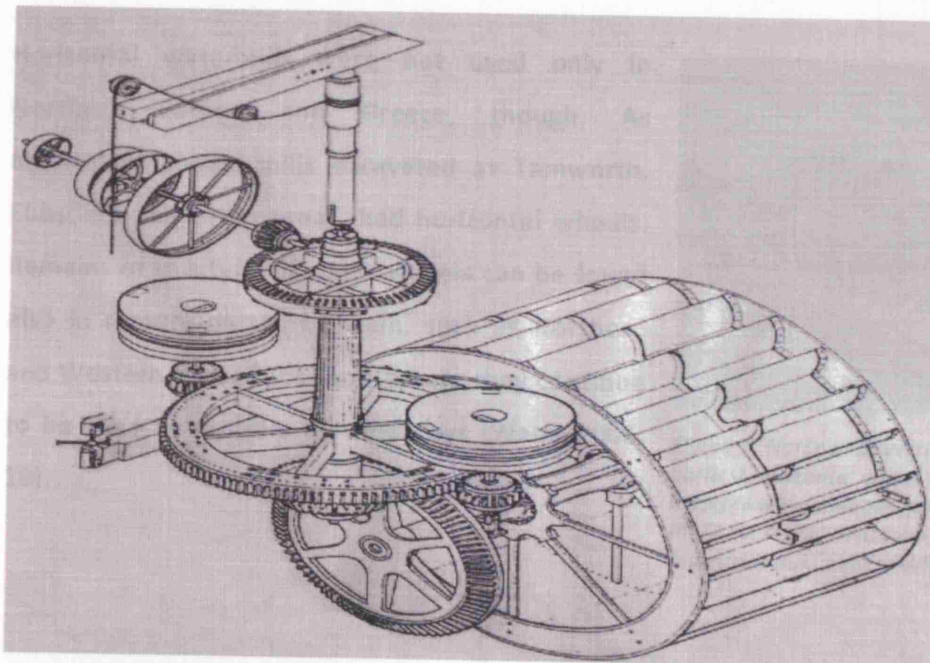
Watermill gearing system SOURCE: <http://www.norfolk Mills.co.uk/watermill-machinery.html>
